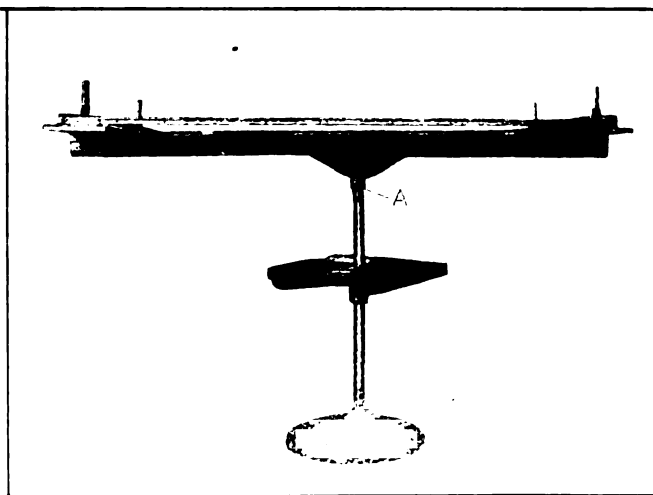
THE FIXTURE SET UP IN POSITION ON THE WELDING STAND
